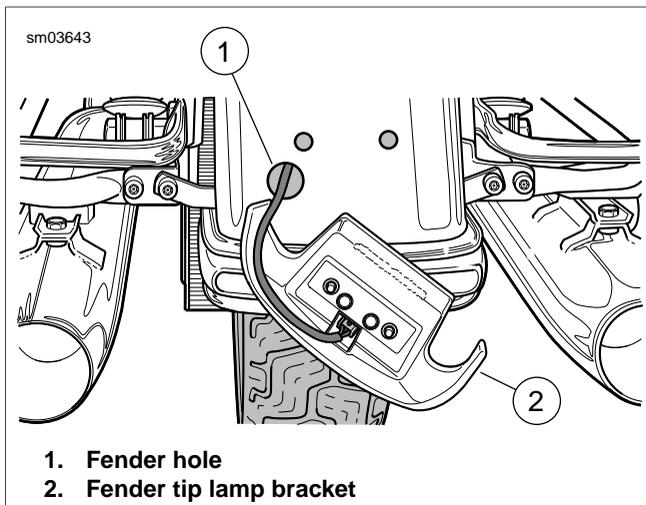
Feed Fender Tip Lamp Socket and Conduit Through Fender Hole
